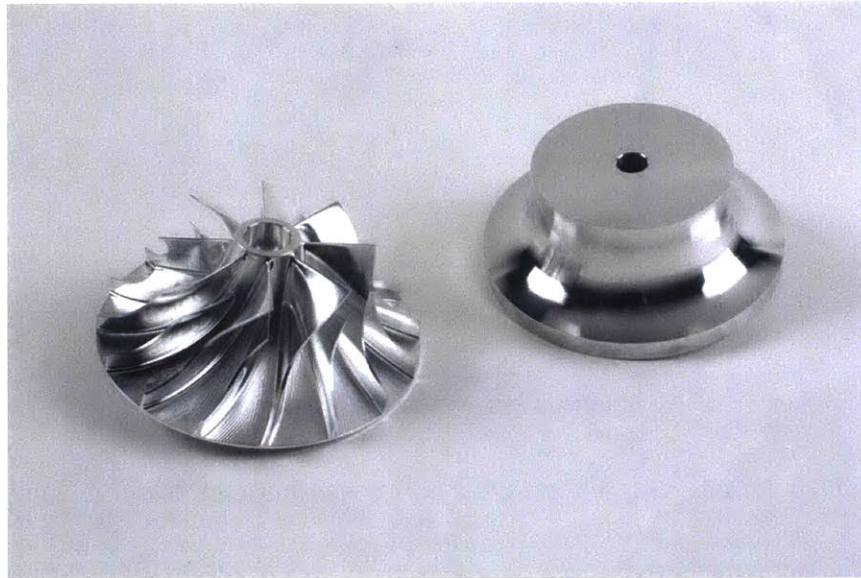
Beginning billet (right) and finished supercharger impeller (left) showing the large amount of material that must be removed when manufactured using subtractive manufacturing techniques [28].
